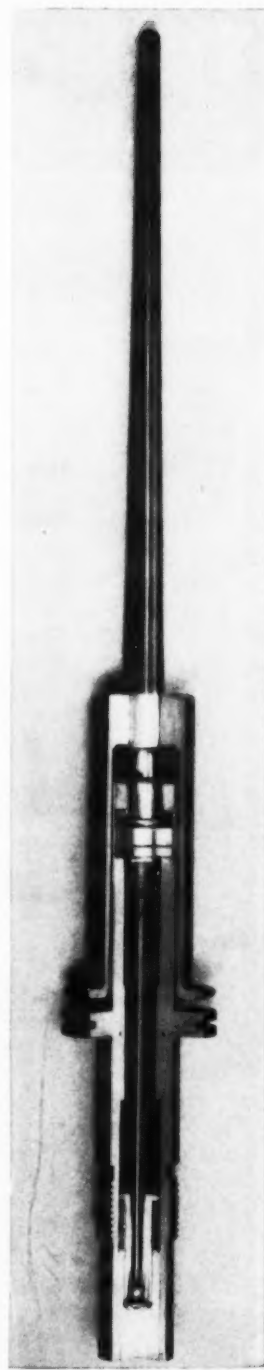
Details of a high-speed "Uniflex" roller bearing upwinder spindle. This design is unique in that it contains no free oil and is lubricated only once a year. The bearings receive lubrication by seepage of oil from oil-soaked felt rings through porous bronze bushings.
